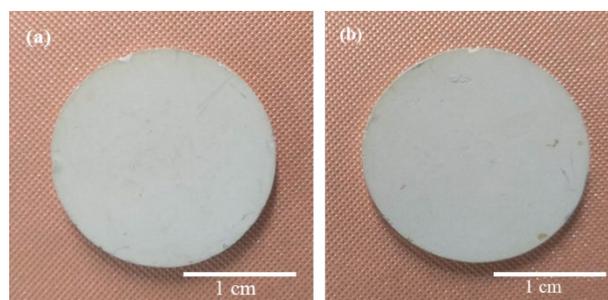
Silver injection moulded specimens (a) S-42 and (b) S-45 after water immersion.
